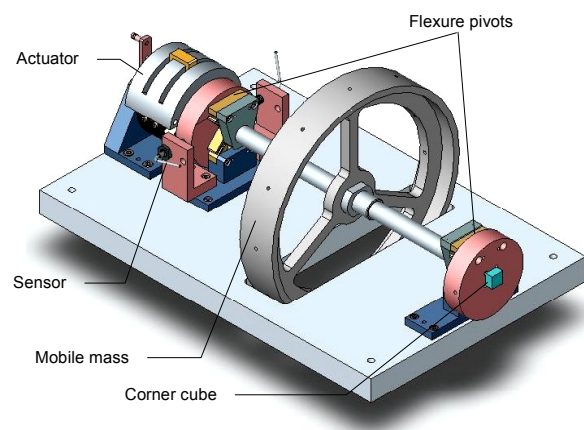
Pair of "butterfly" flexible pivots mounted on a test bench composed of a flywheel (mobile payload), a voice coil actuator, a pair of position sensors and a corner cube mirror used to measure the rotation centre shift.
